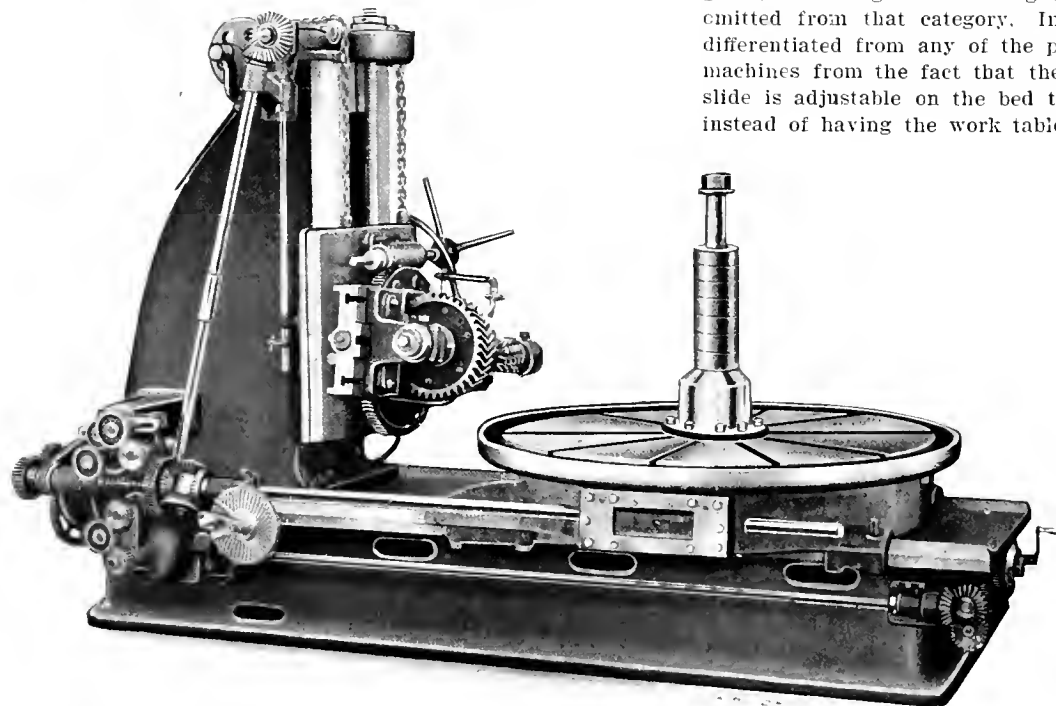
Pfaunder Gear-hobbing Machine, sold by Schuchardt & Schutte.
